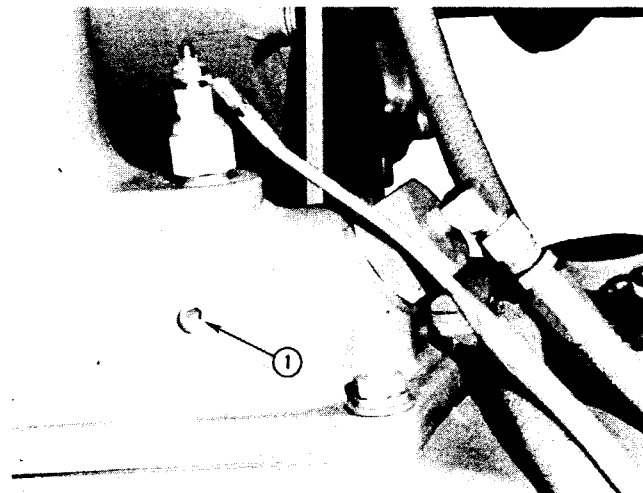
(N11949) Glow plug inspection hole plug - NT engine
